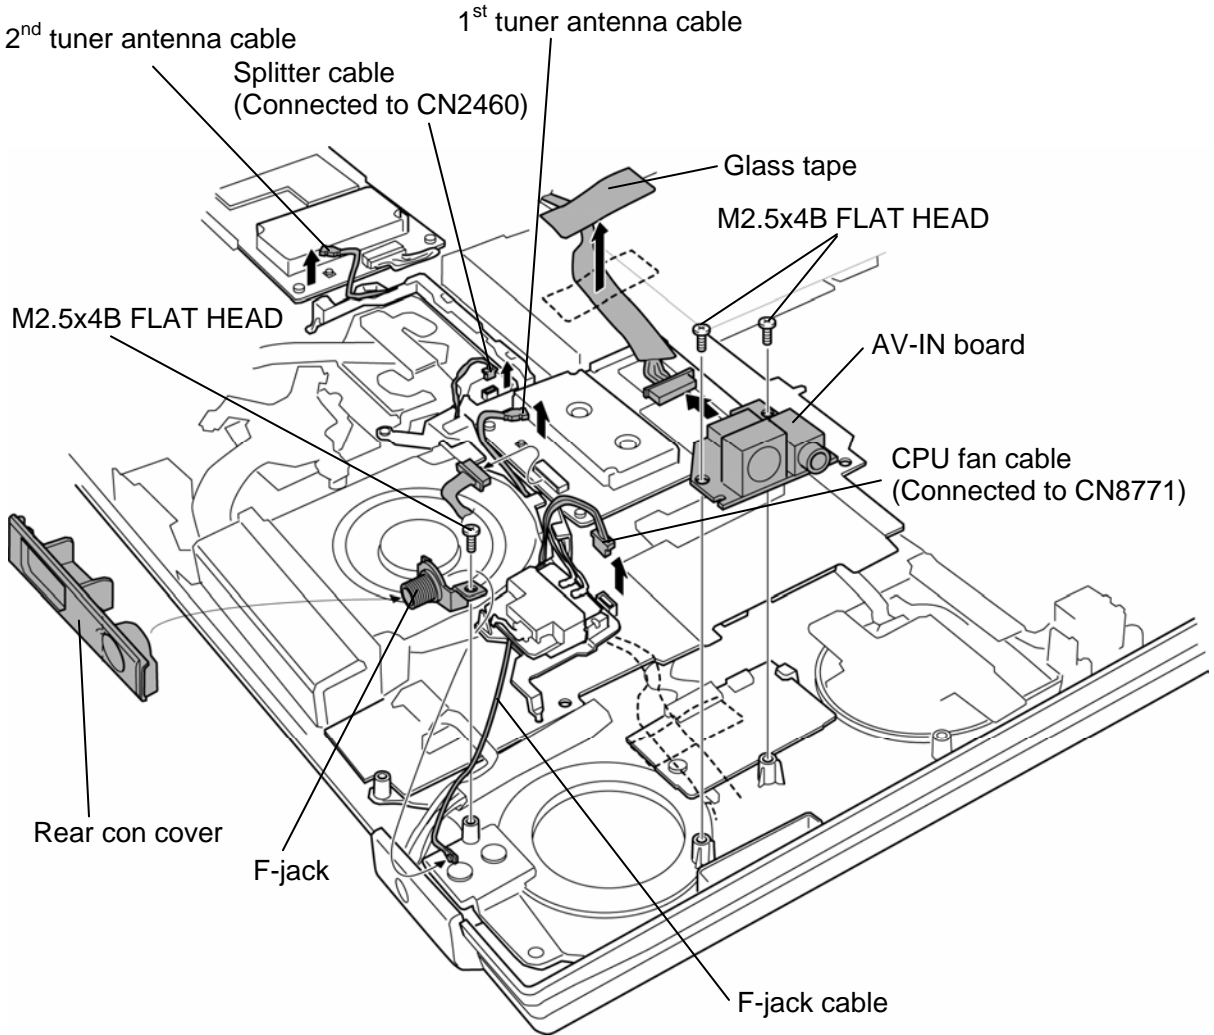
Removing the AV-IN board/F-jack/Rear con cover (two tuner model)
